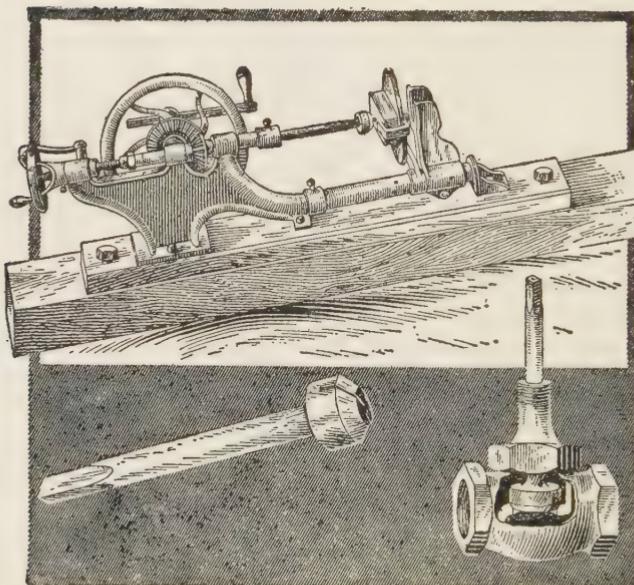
AN EMERGENCY VALVE-GRINDING TOOL
